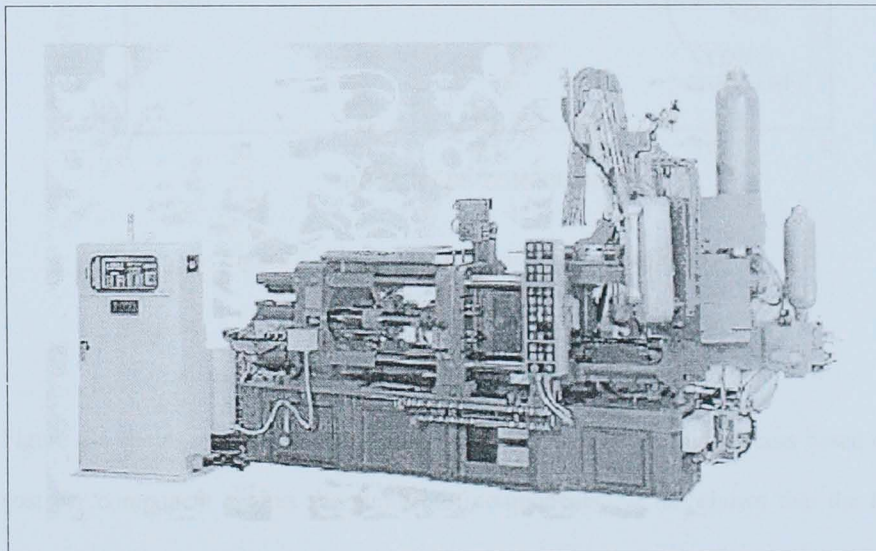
Commercial High Pressure Die Casting machine [9]
